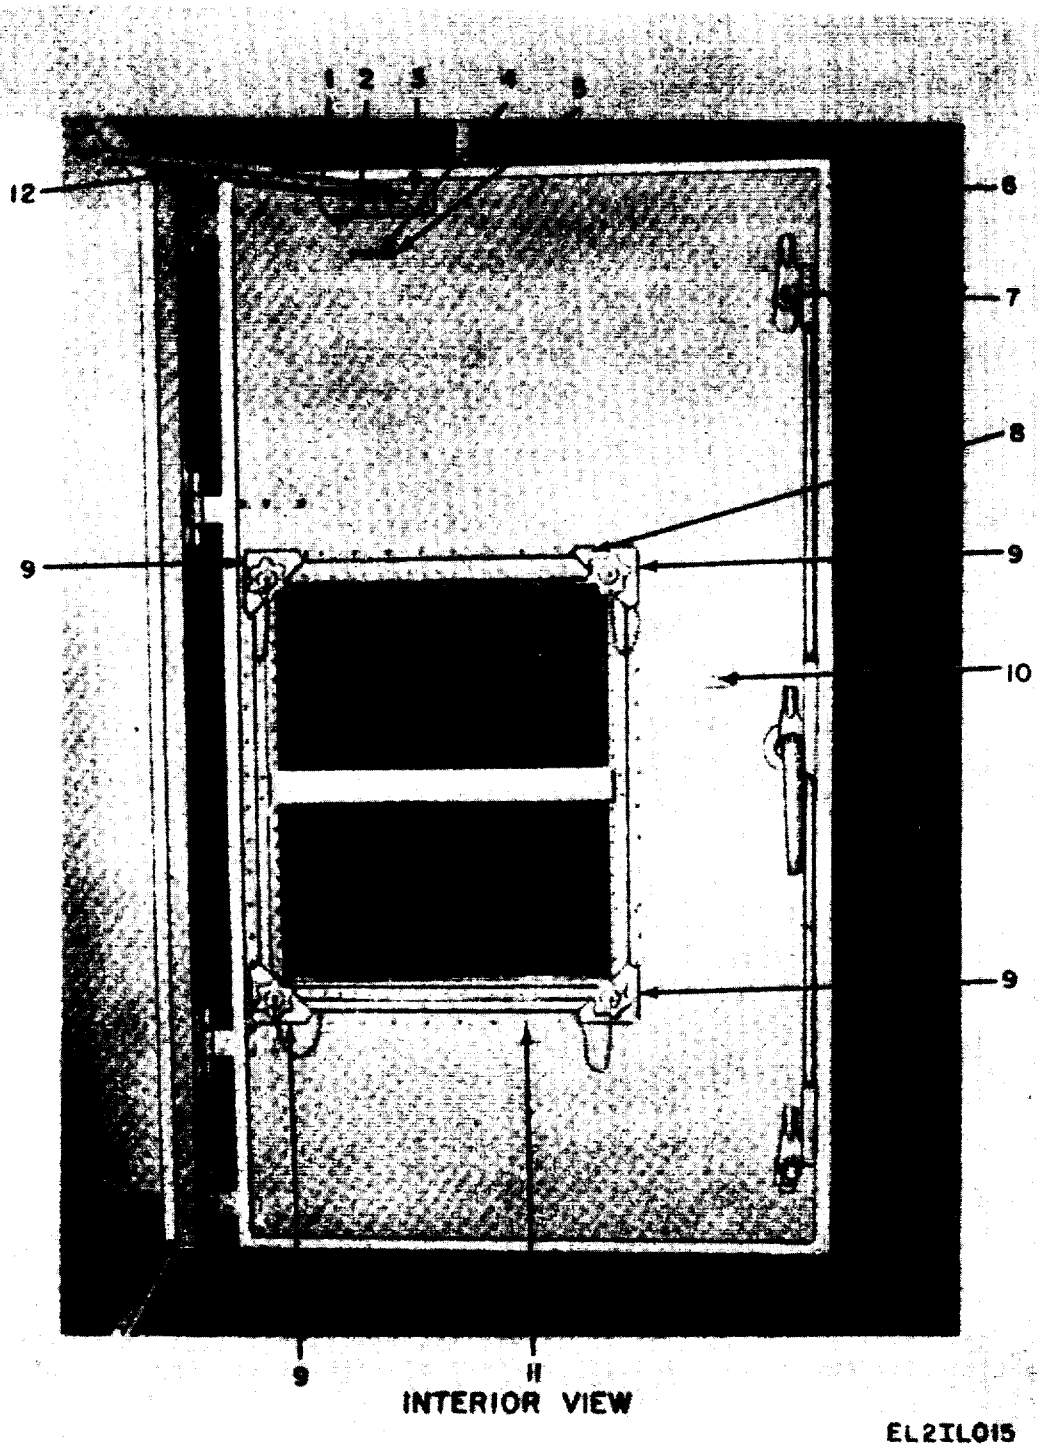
Door Assembly, Interior View, S-280B/G Shelter.
